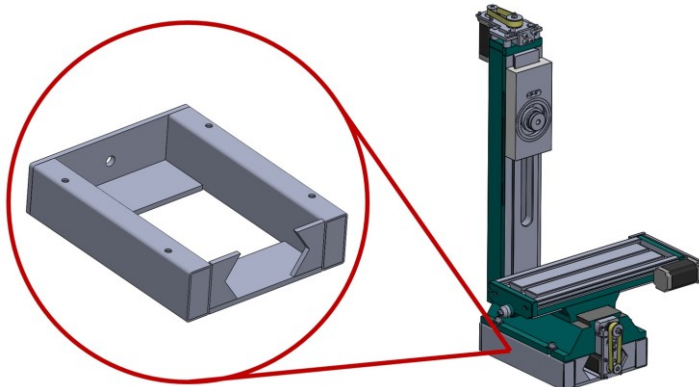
The metal frame built to lift the machine to create room for the motor of the Y axis
